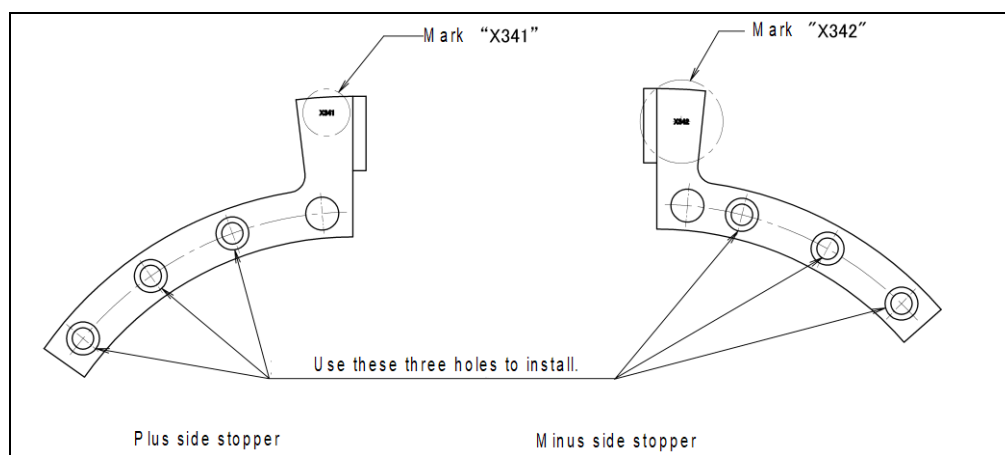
(a) Mounting the J1-axis mechanical stopper
